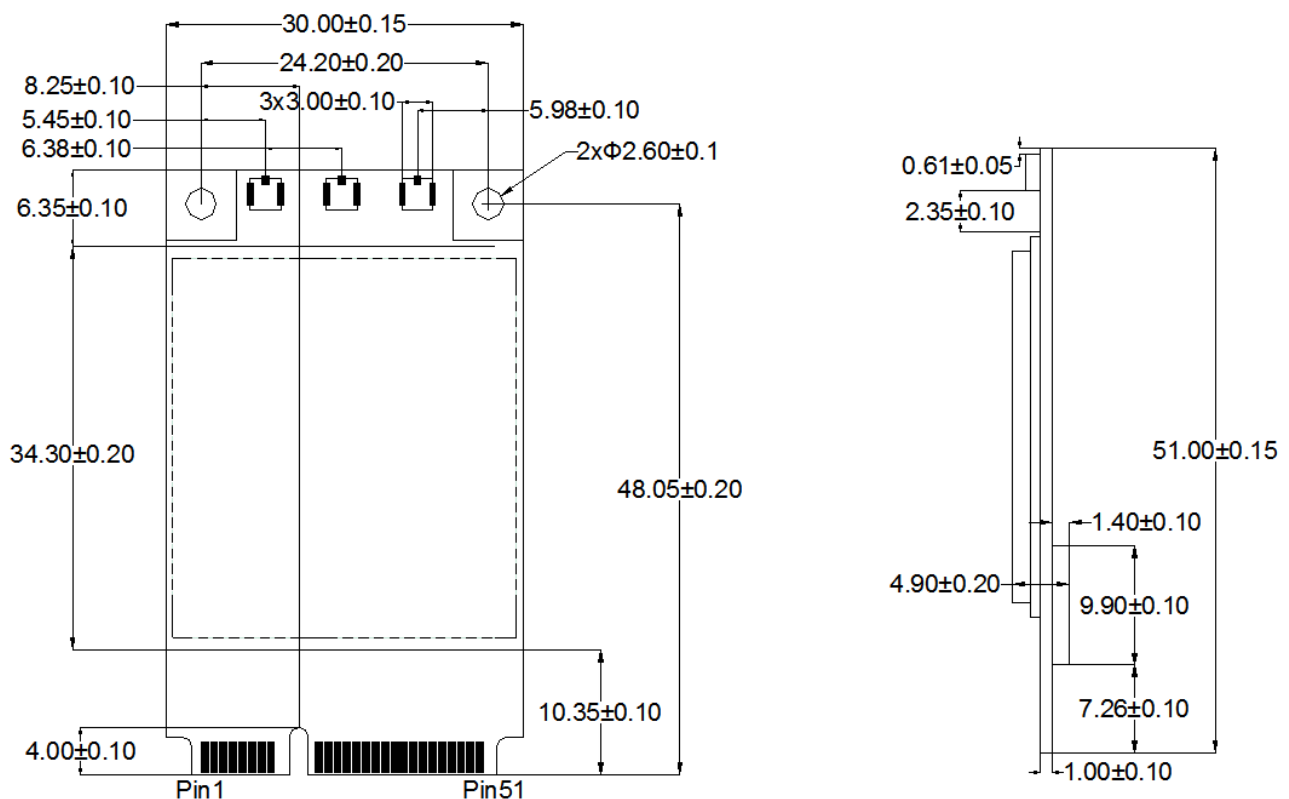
Mechanical Dimensions of EC25 Mini PCIe
